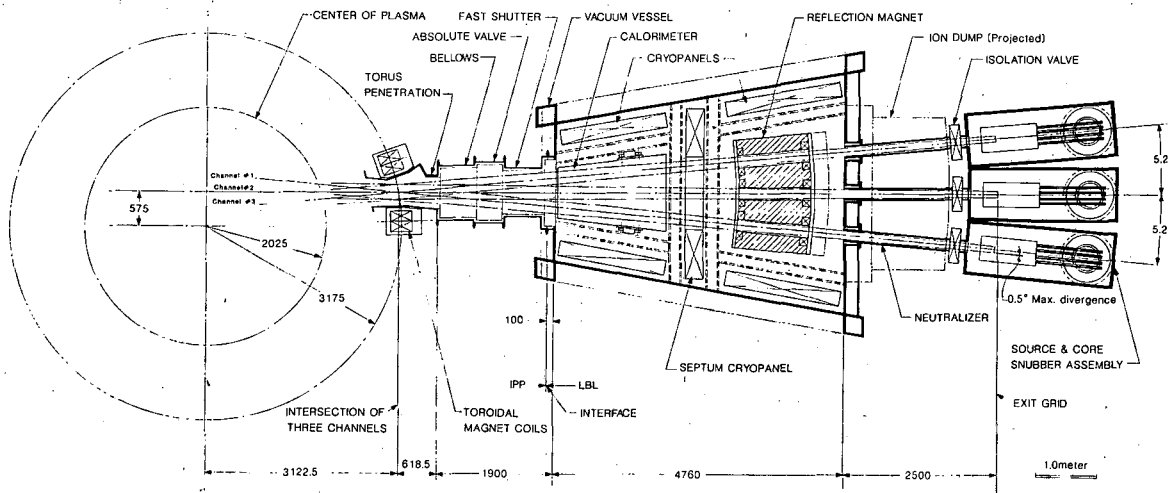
Plan view of proposed ZEPHYR neutral beam line.
